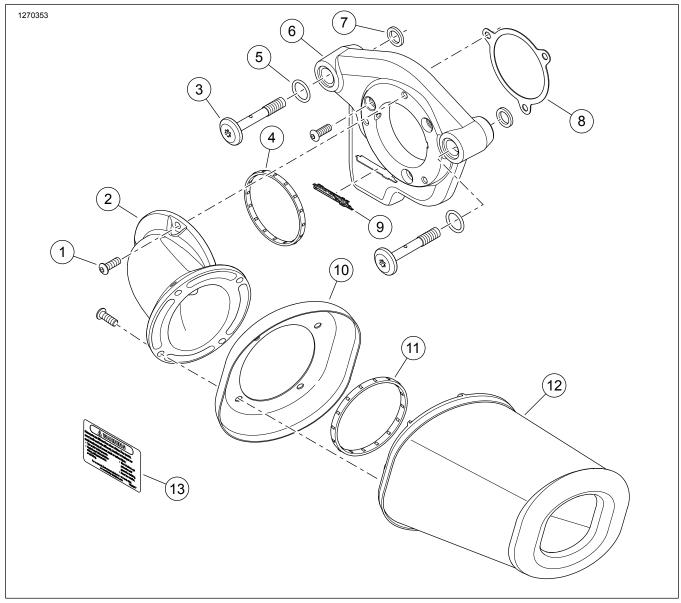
Service Parts: Screamin' Eagle Extreme Heavy Breather Air Cleaner Kit
